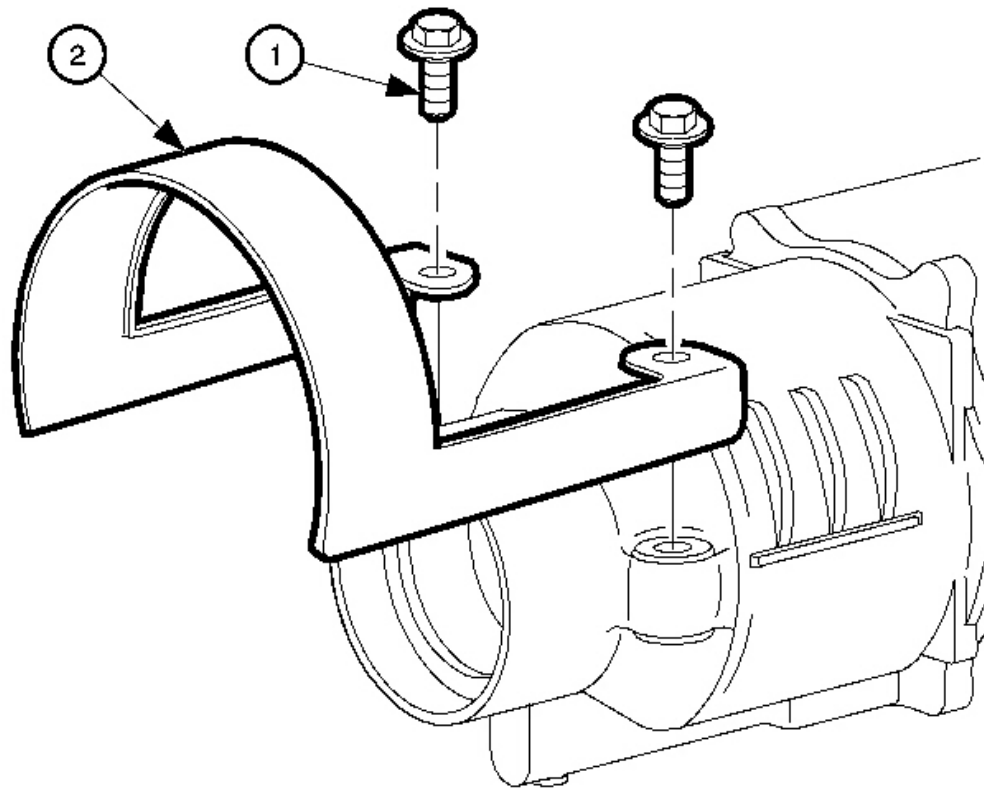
Removing/Installing Rear Drive Module (RDM) Propeller Shaft Guard
